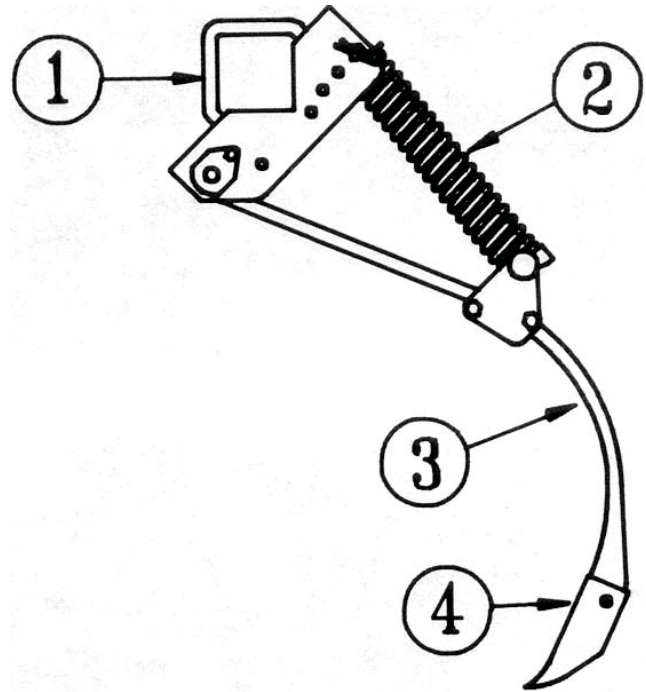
Floating Hoe Opener Assembly: (1) Frame Mount, (2) Compression Spring, (3) Shank and (4) Hoe Point Opener.
